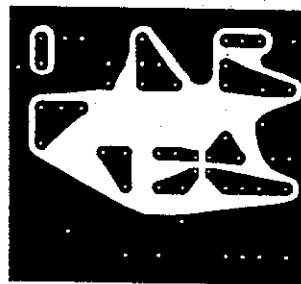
Printed-circuit board layout for the T-R switch. Component layout is shown in fig. 5.
